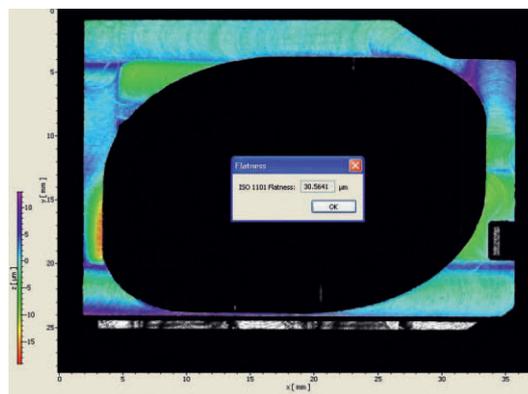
A defective mirror holder shows a flatness measurement (>30 μm) that fails dimensional tolerances (ISO 1101).
